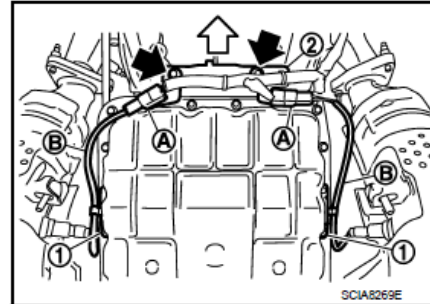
Identifying Heated Oxygen Sensor 2 Connectors
